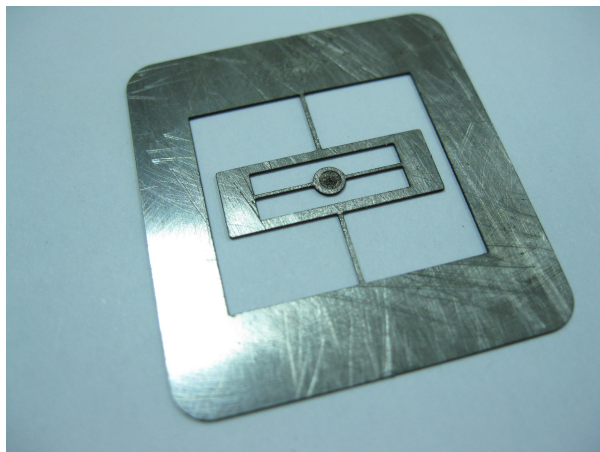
Fabricated 2D gimbal mounted EDM scanner.
